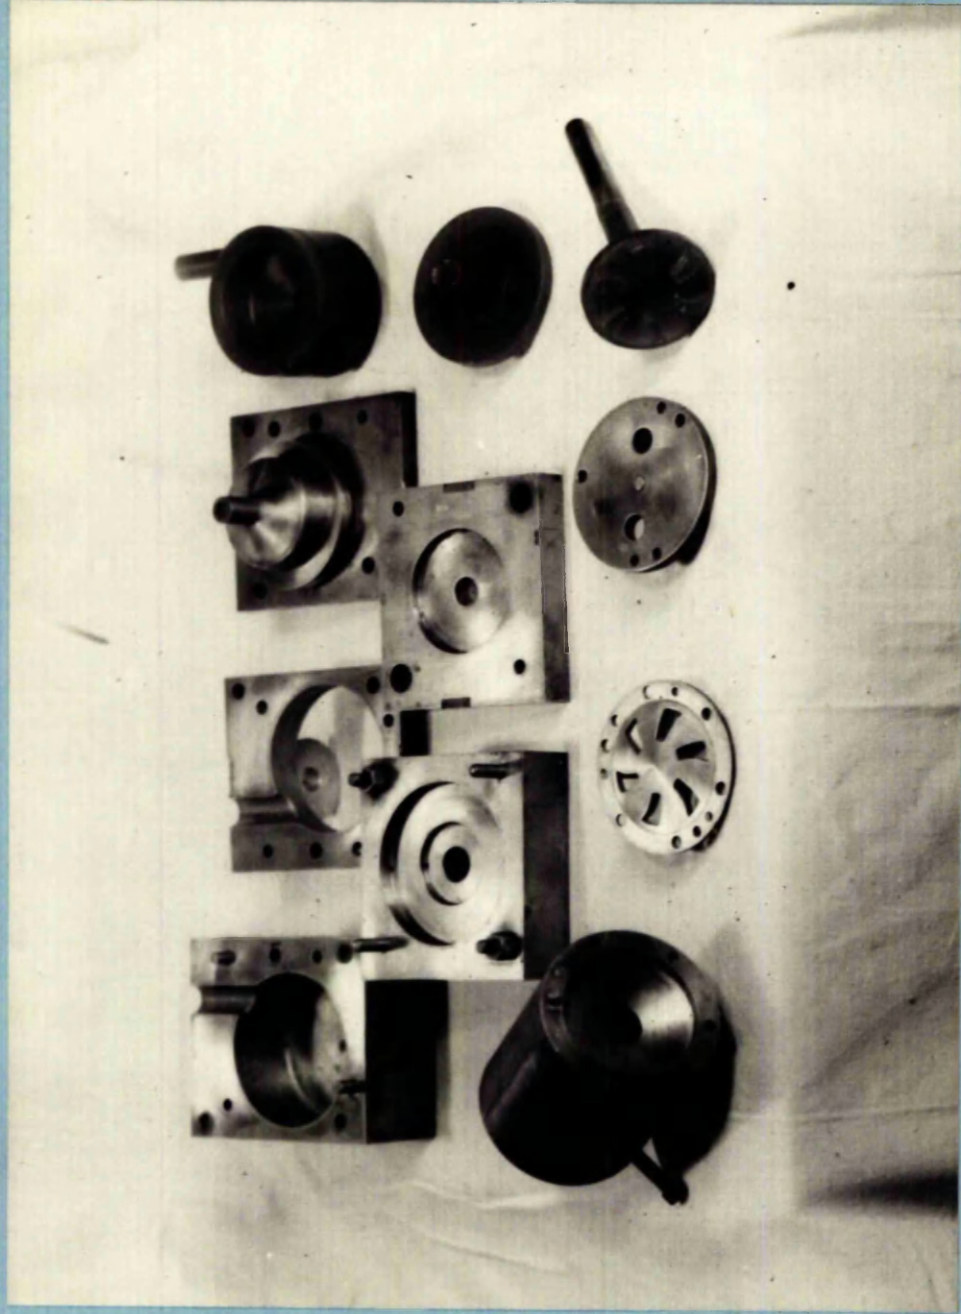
STEEL DIE-MOULDs AND POLYESTER RESIN PUMP COMPONENTS.
